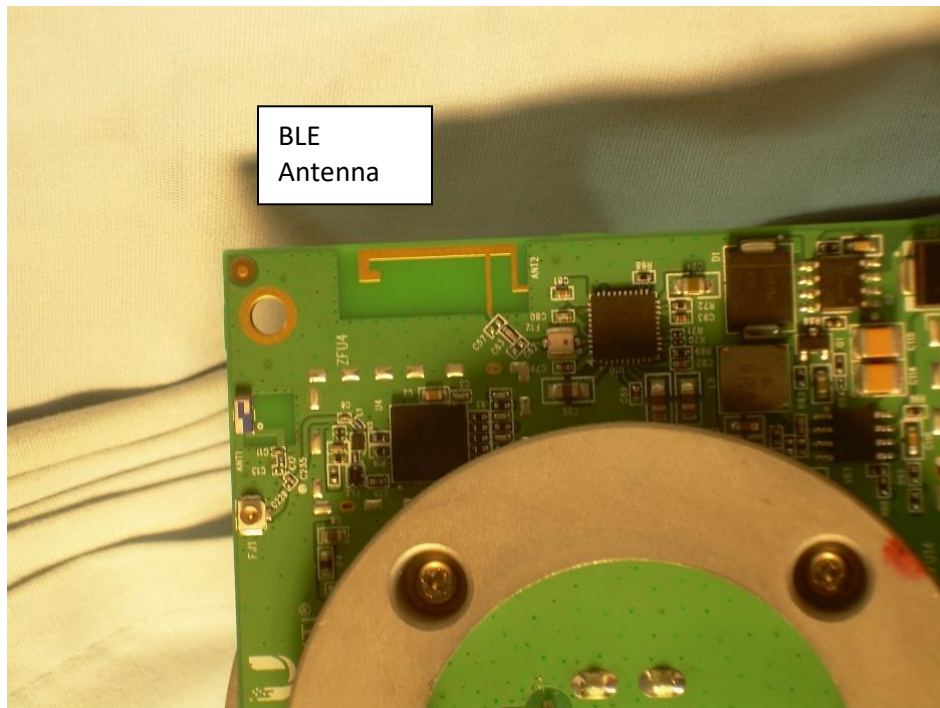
Internal Back View of the EUT With RF Shielding Open
